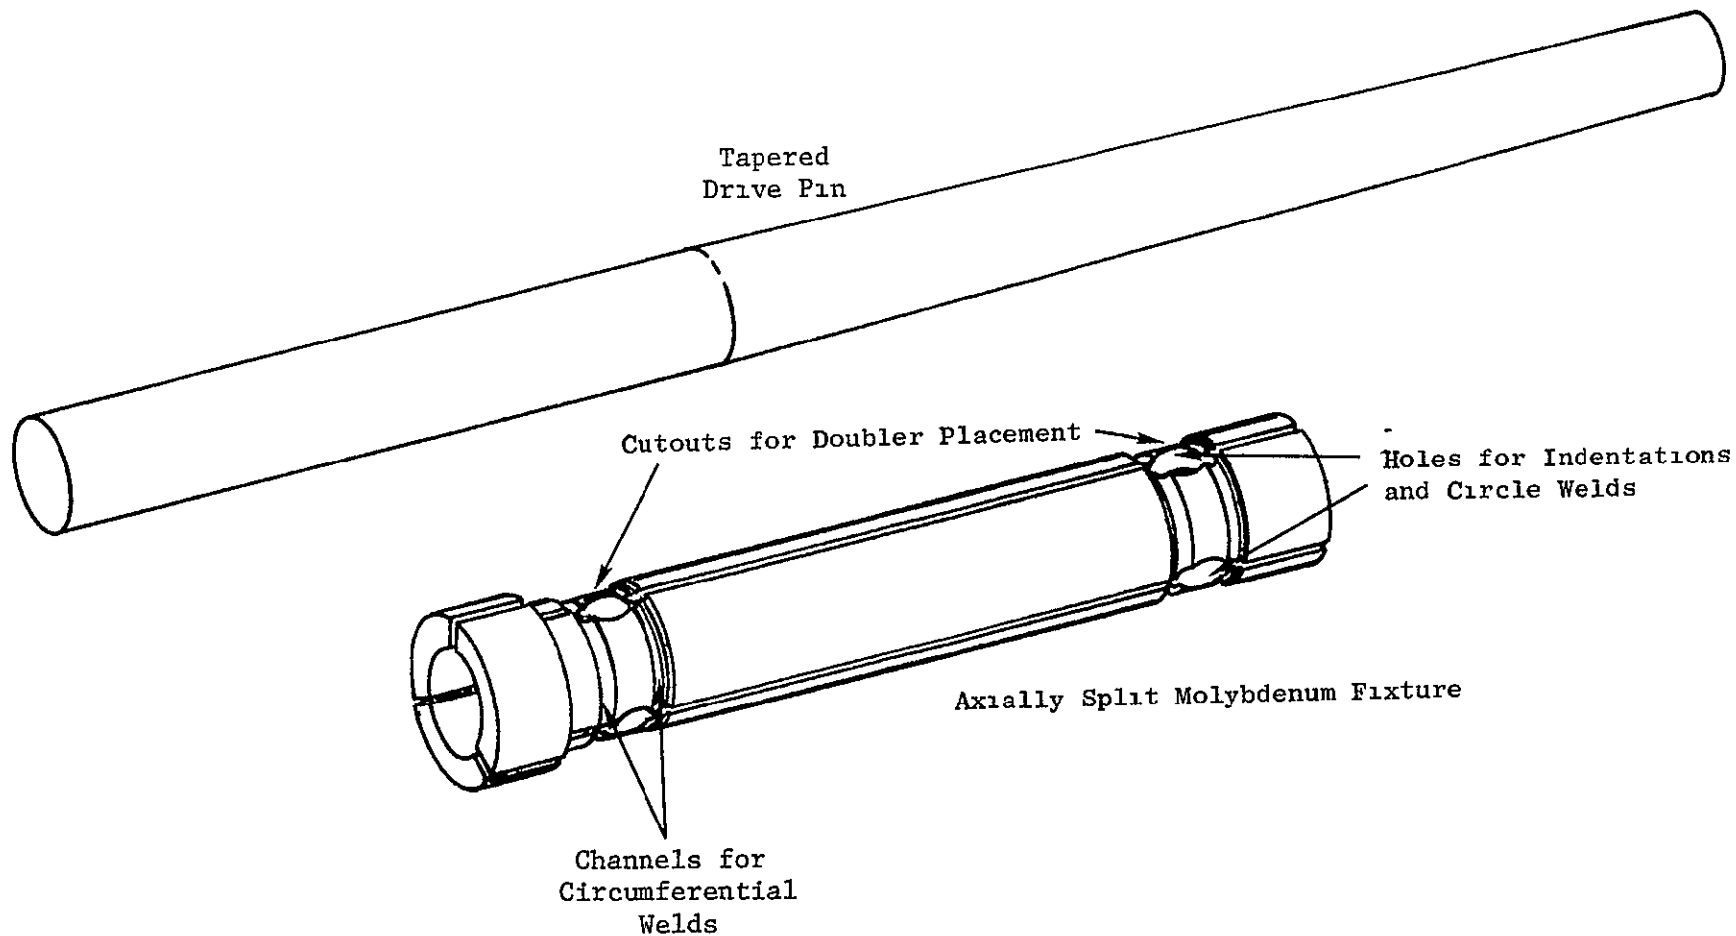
Section of the Expandable Molybdenum Fixture, With Tapered Drive Pin, Used in Electron Beam Welding of Doublers to Honeycomb Tubes.
